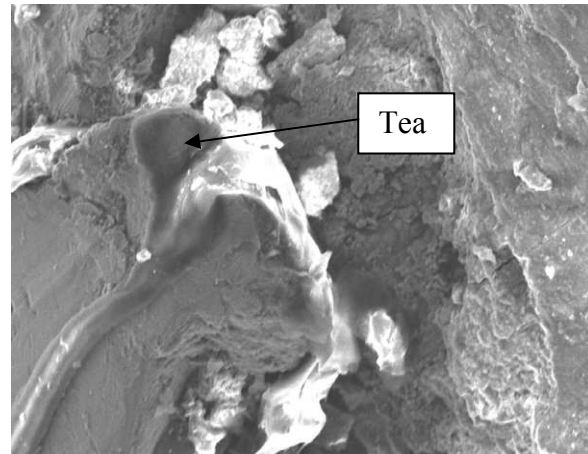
SEM Fractograph of failed valve end (weldment) of nipple, x500
